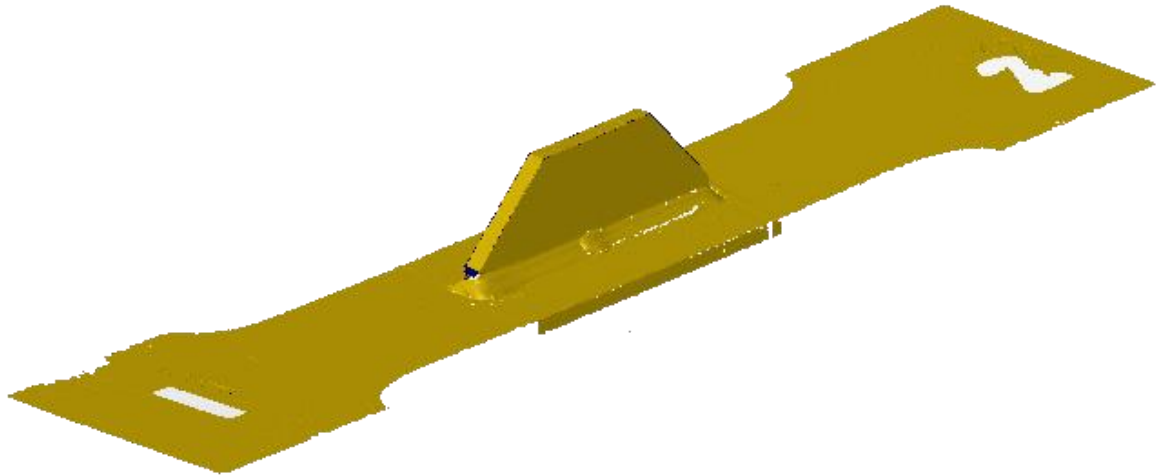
Overall view of a 3D scanned specimen and its weld.
